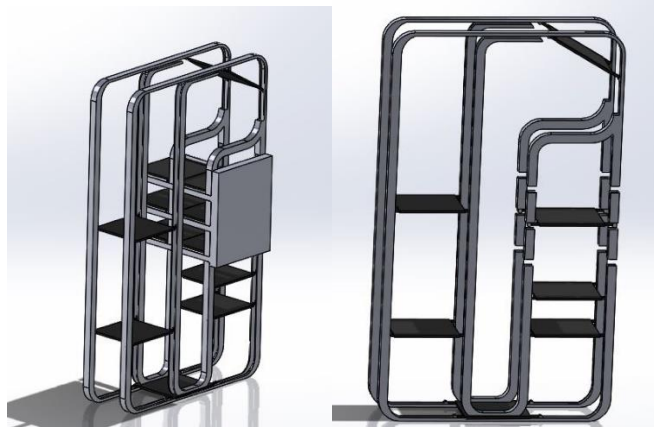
(left): V.L.A.D.'s front guiderail conveyor system (loading drawer closed)
